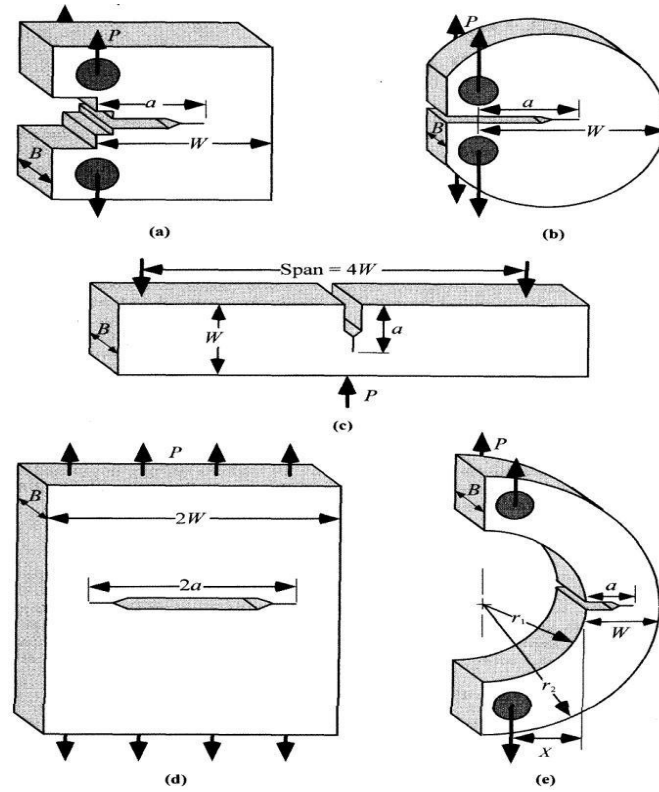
Standardized ASTM E399 fracture mechanics test specimens [9]
